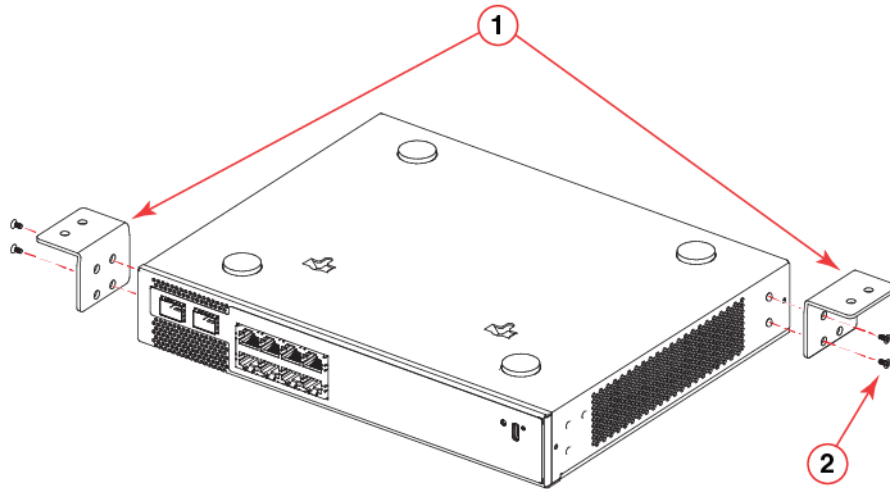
Attaching the Long Front Brackets for Ceiling Mounting
